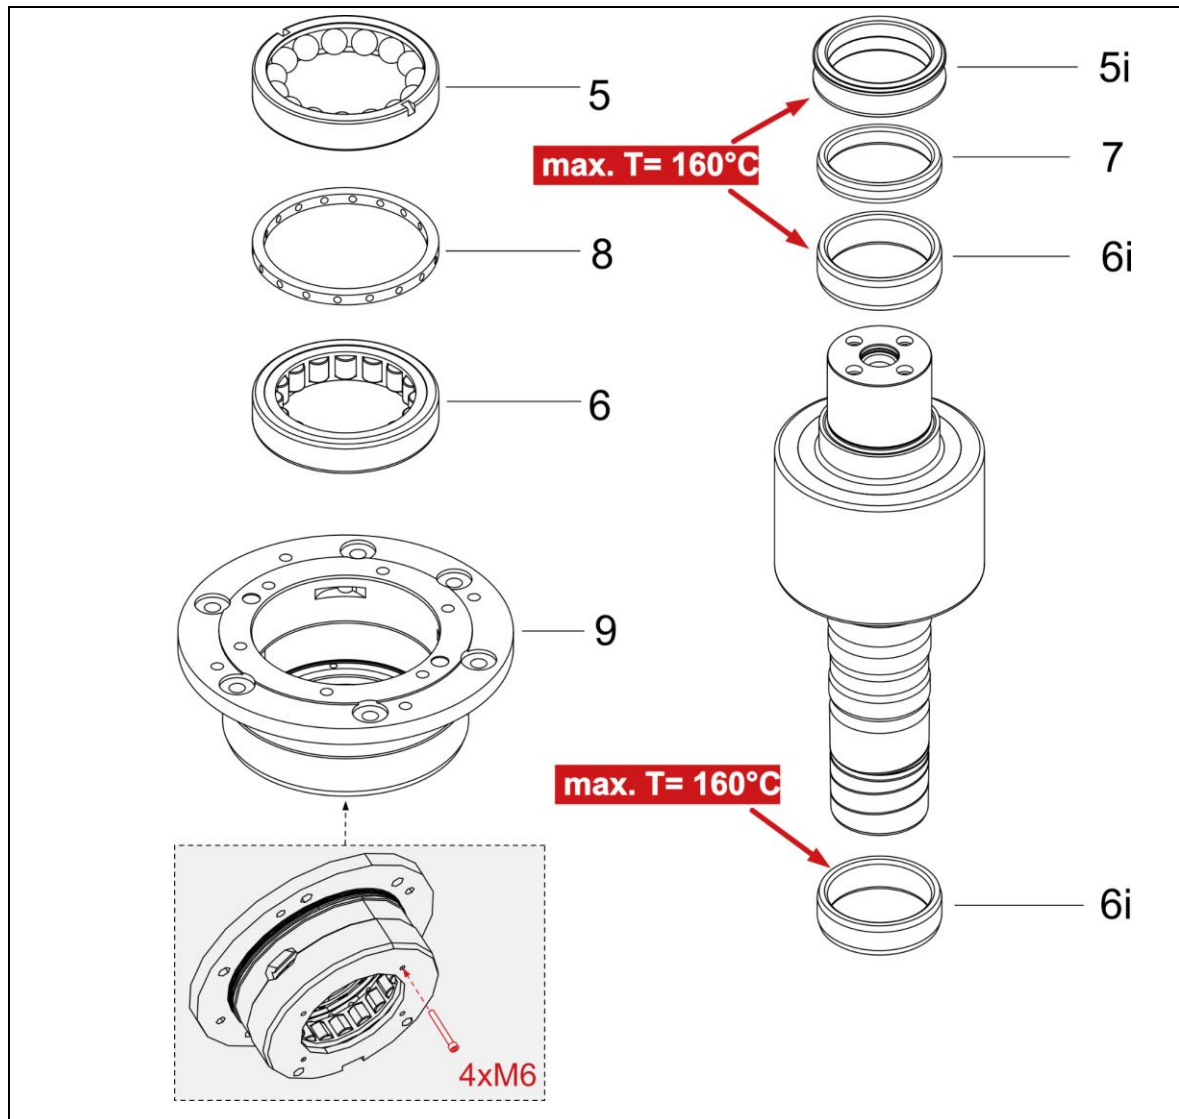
Removing bearing parts from bearing cartridge HS-WS and pinion
